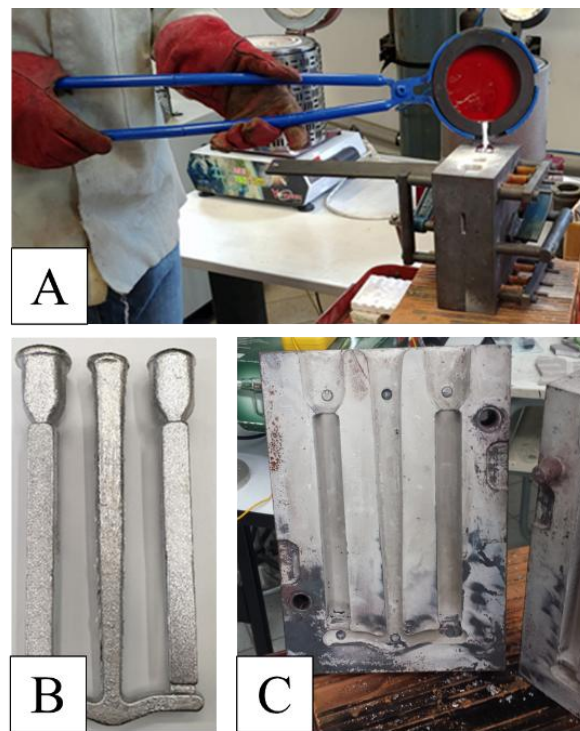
Manual gravity casting. A: casting procedure; B: cast for mechanical samples; C: mould for mechanical samples.
